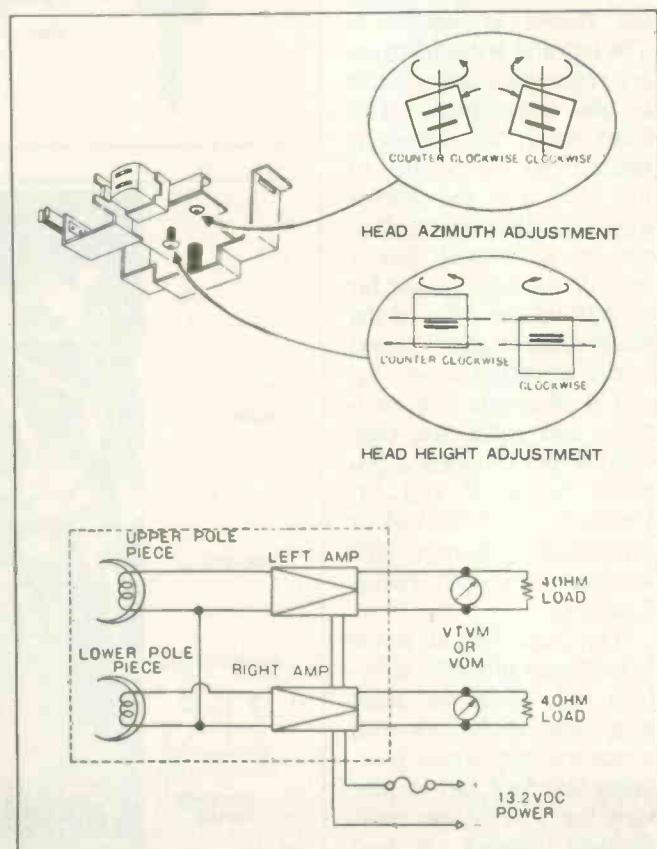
Head alignment diagram for a Blaupunkt eight-track player.
